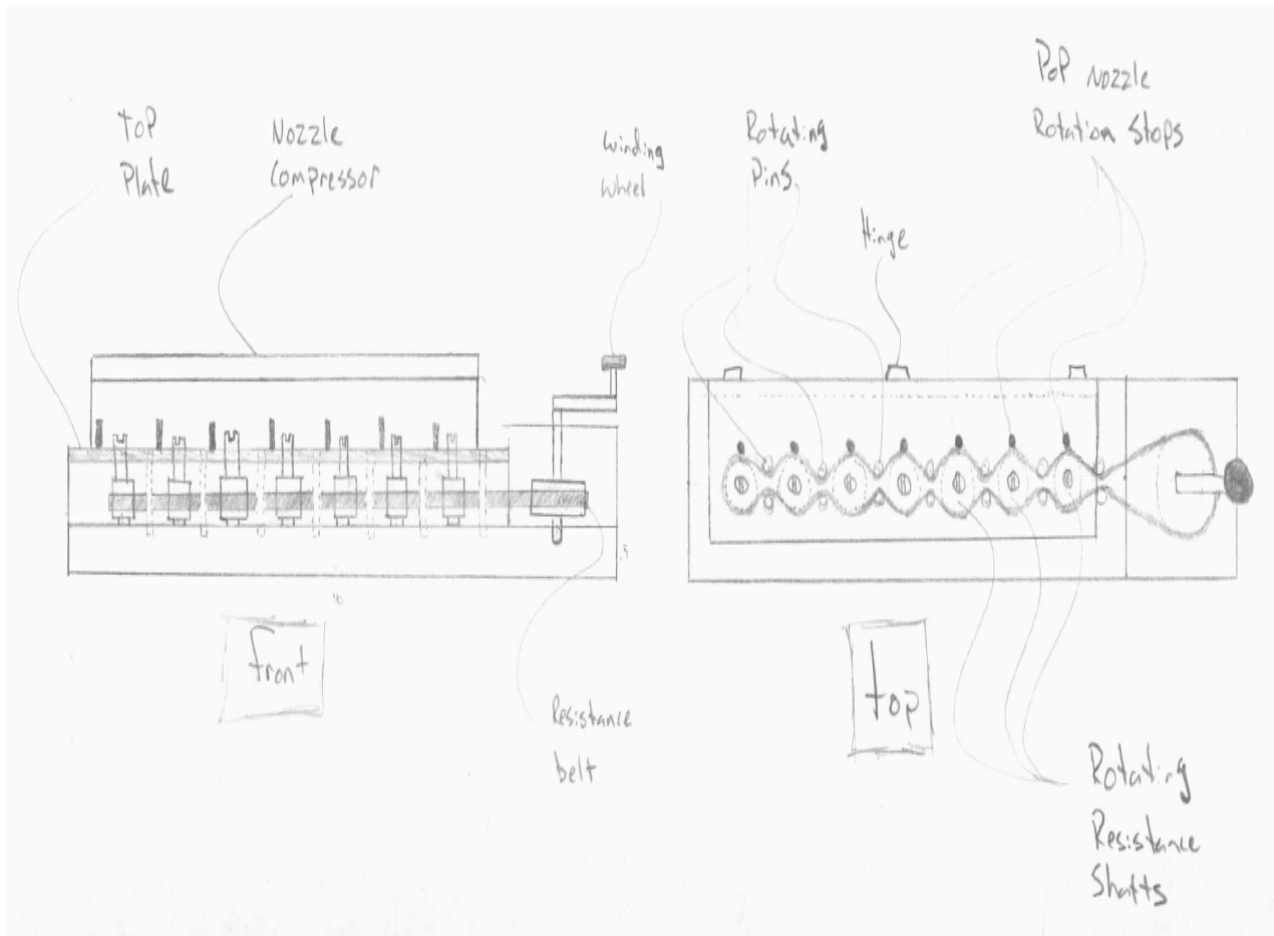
Design 2, Concept of a Multi-Assembly Resistance Belt Jig
